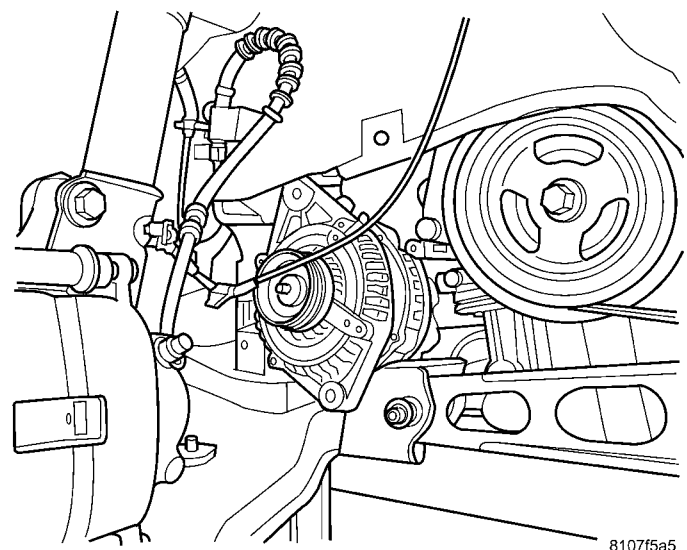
GENERATOR REMOVAL/INSTALLATION
